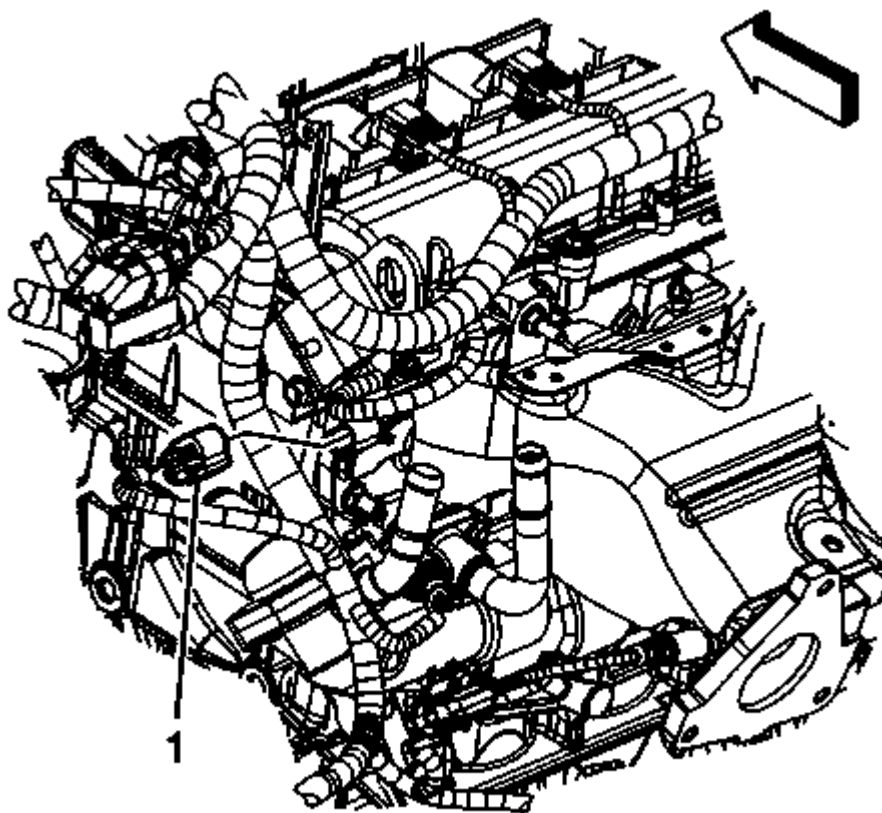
Locating Intake Camshaft Position (Cmp) Sensor And Intake Camshaft Position (Cmp) Sensor Connectors
